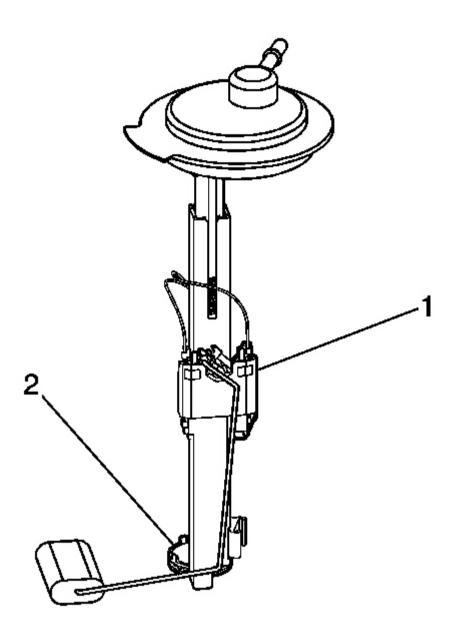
View Of Secondary Fuel Tank Module Courtesy of GENERAL MOTORS CORP.
